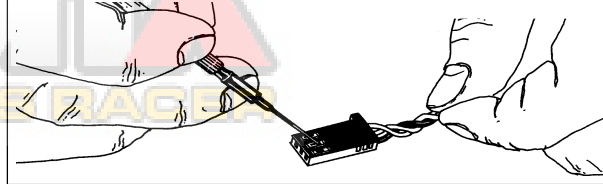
With the screwdriver, carefully lift up each of the metal locking tabs to the angle shown.
